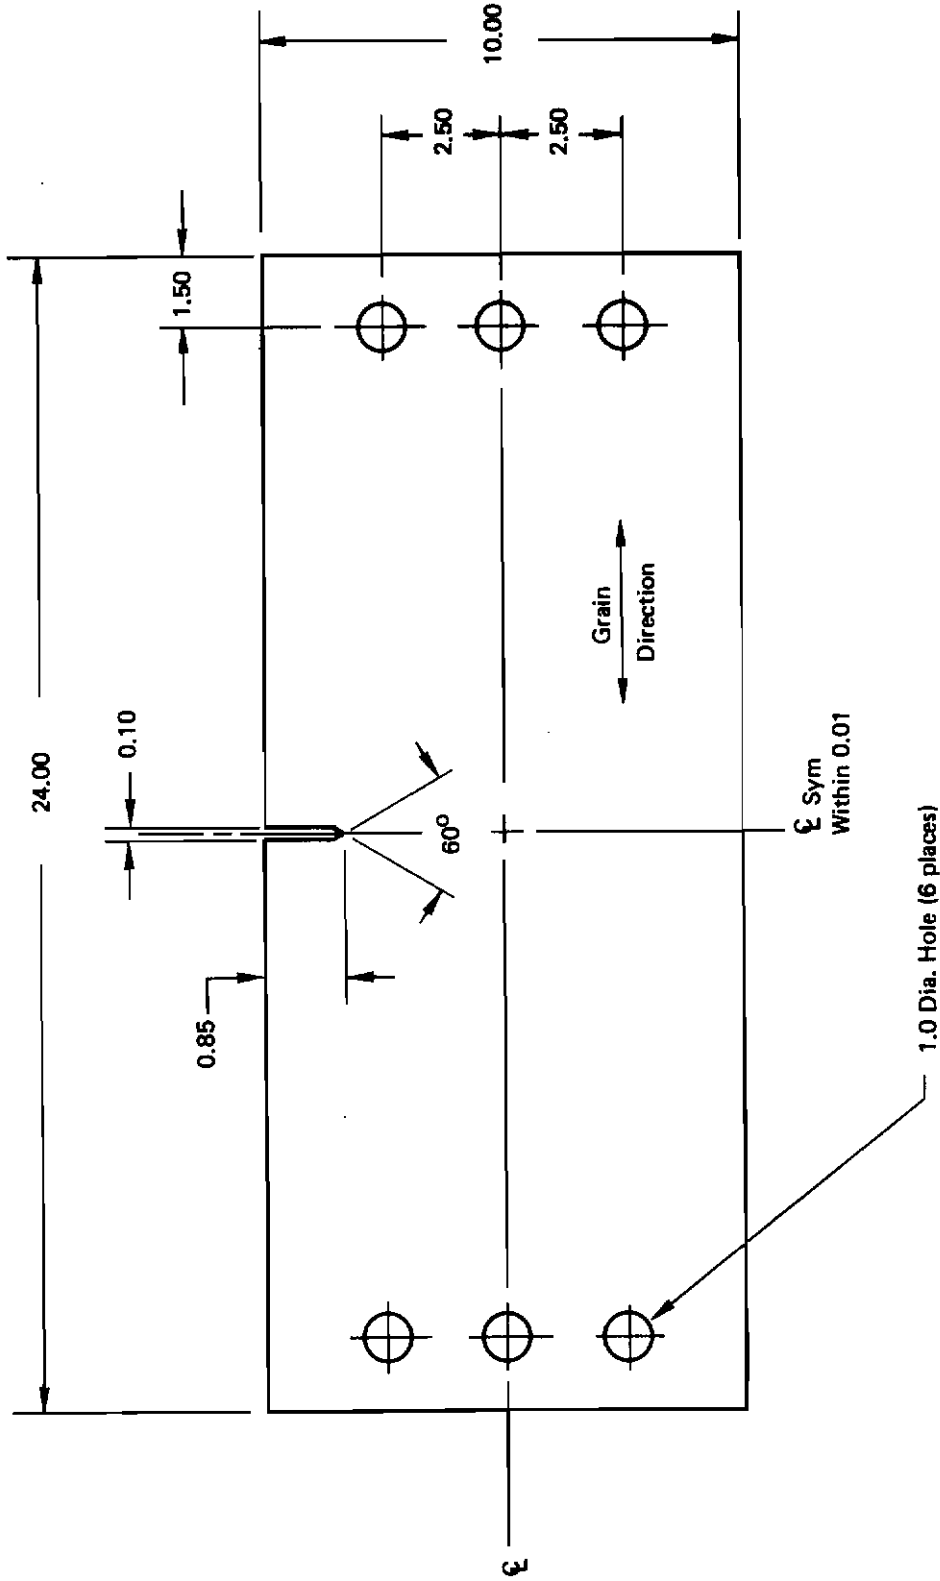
Single Edge Cracked Specimen Of 7075-T6 Aluminum For Crack Velocity Measurement
